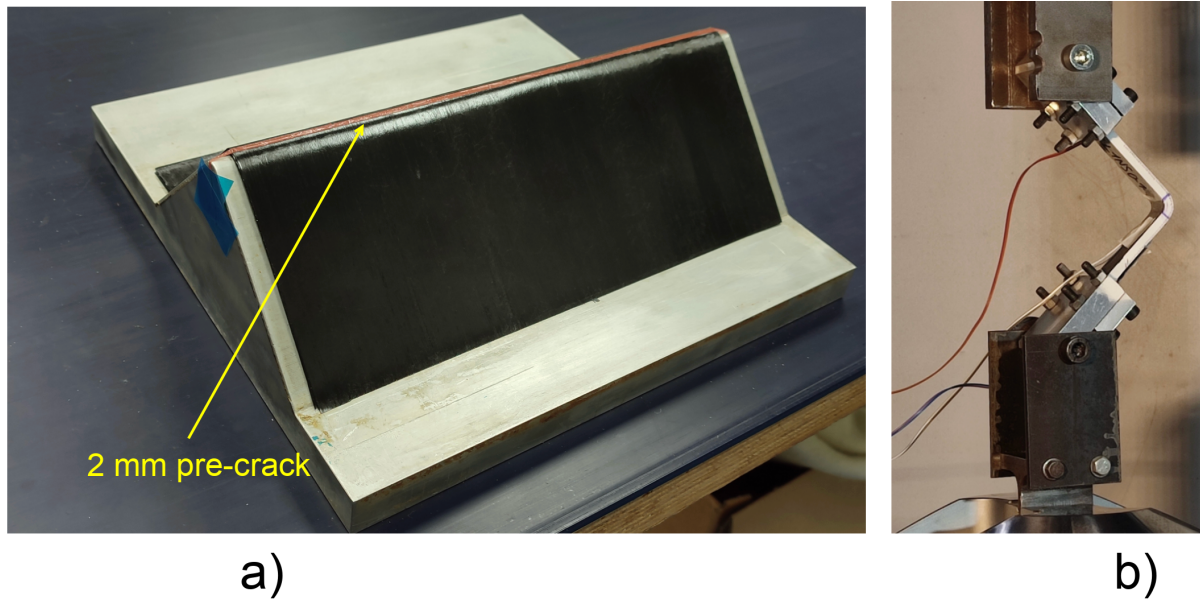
a) lamination of L-shaped specimens with detail of the pre-crack; b) test setup of L-shaped specimens.
